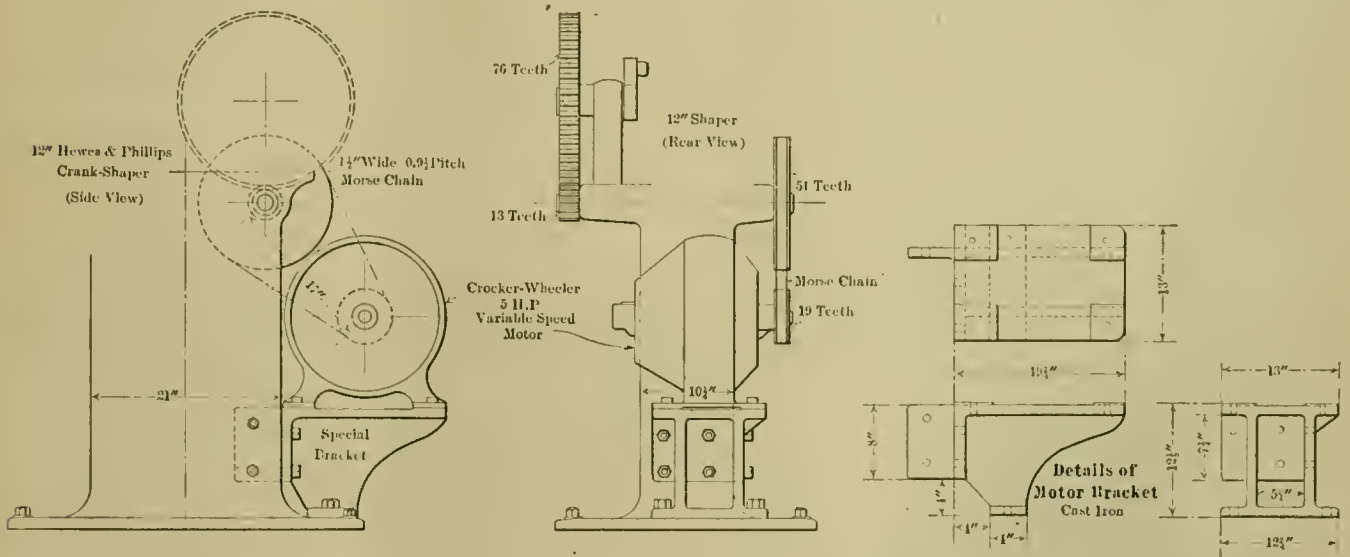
DETAILS OF THE MOTOR DRIVE APPLIED TO THE HEWES & PHILLIPS SHAPER, SHOWING STYLE OF MOTOR SUPPORT BRACKET.
